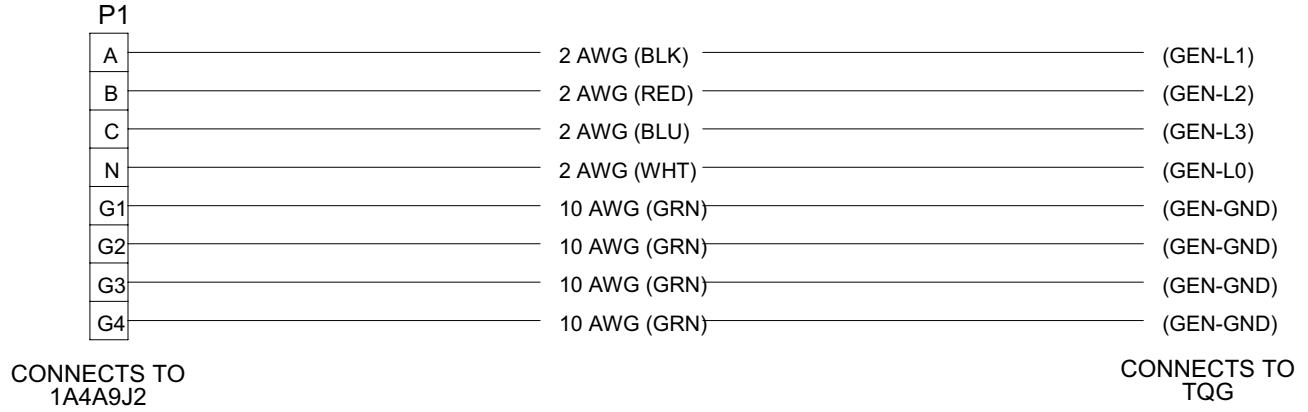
Electrical Cable Replacement (Sheet 12 of 12)
